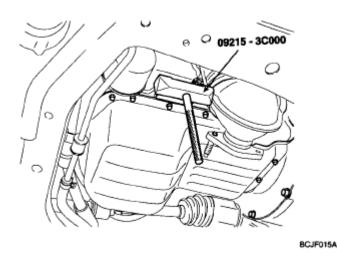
Identifying SST(09215-3C000) On Oil Pan Courtesy of HYUNDAI MOTOR CO.
